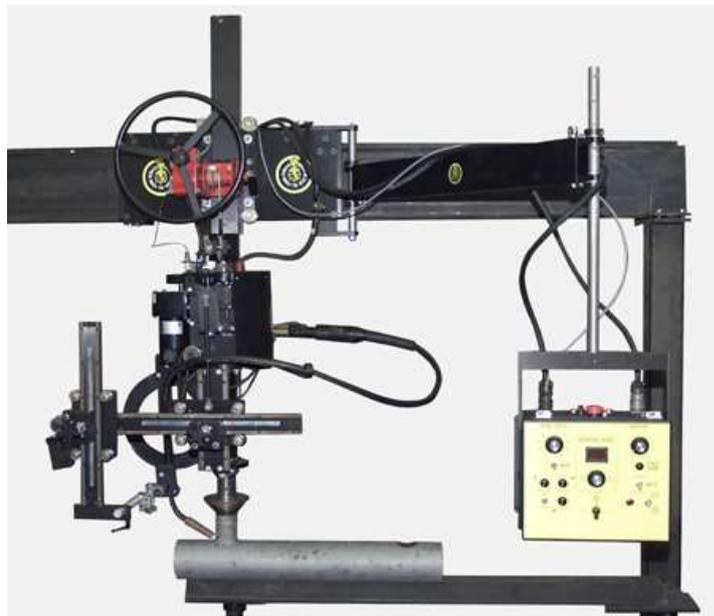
American circle welder for small sleeves. (Cypress Welding Equipment Ltd)
